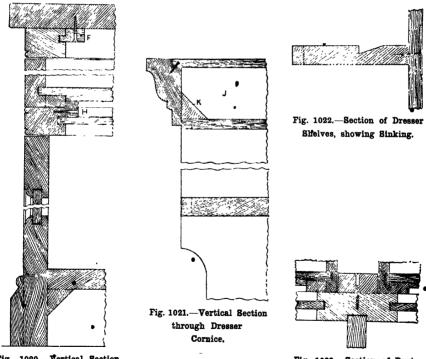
Vertical Section through Dresser Drawers and Cupboards.
